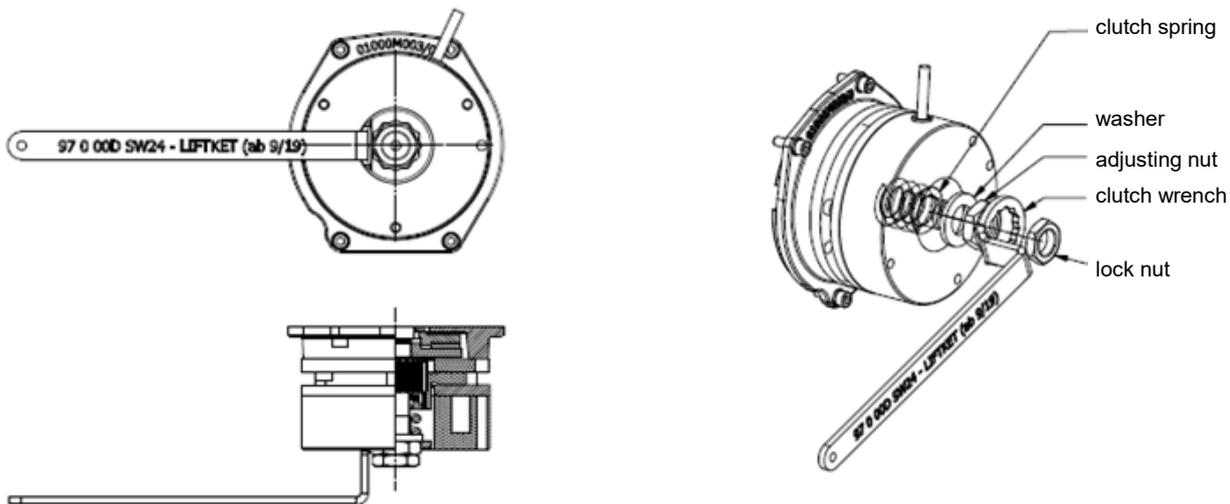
Clutch adjustment version 2-5.1 with BFK brake
